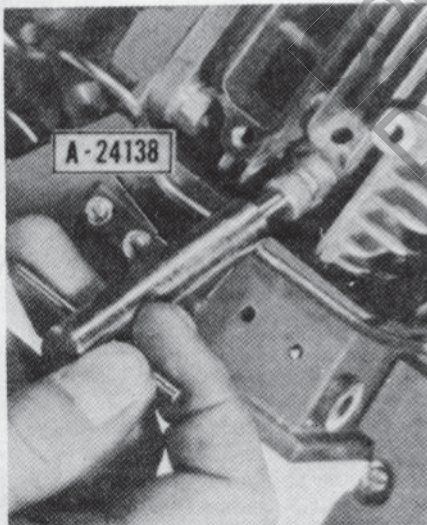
Cleaning compression relief valve seat using Homelite tool No. A-24138. Hold the engine in inverted position so that carbon scraped from seat will fall out.
